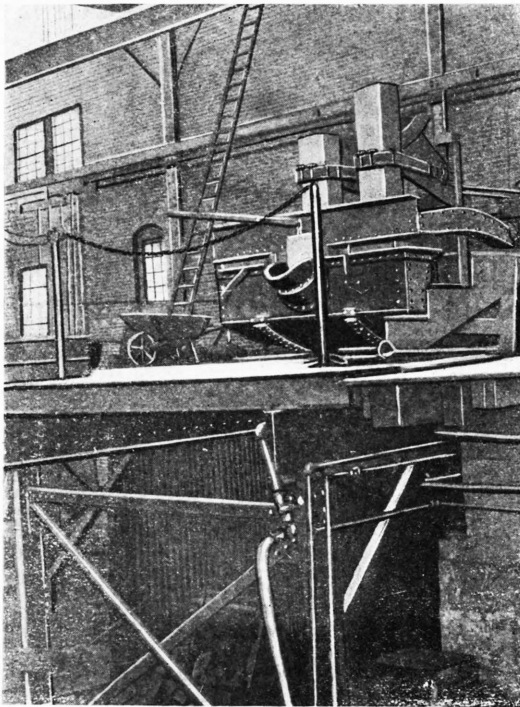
Showing mounting of a Heroult furnace and casting pit.
